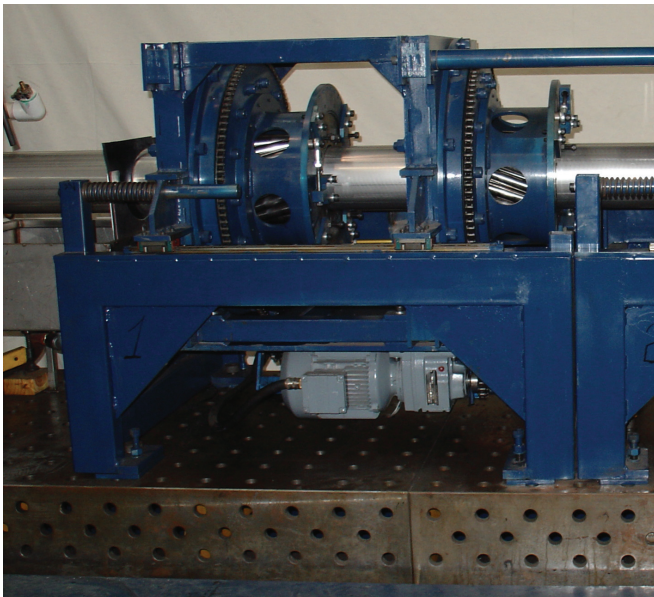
Rotary Sizing Mill sizing 152mm x 2.0mm 304 stainless tube on a TIG mill in Australia
